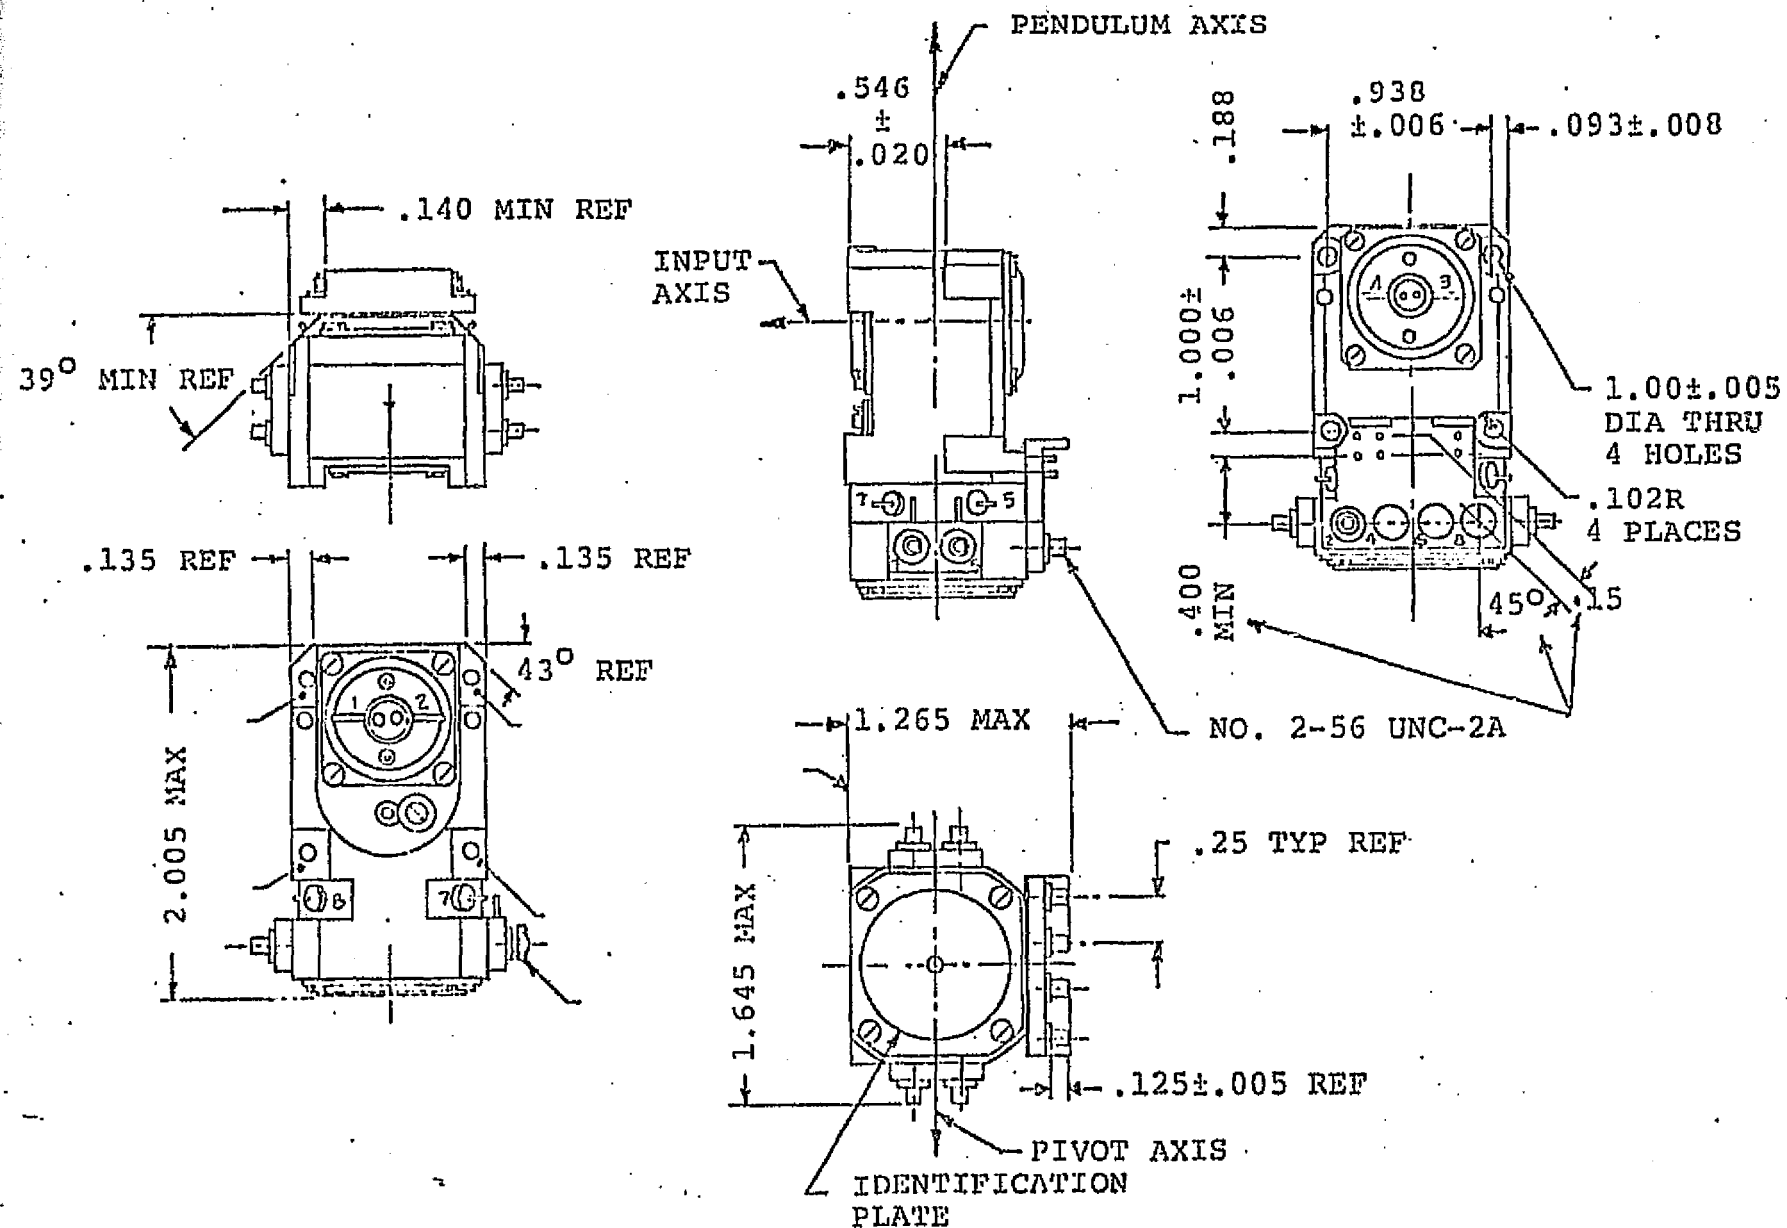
Kearfott 2401 Accelerometer - Outline Dimensions
